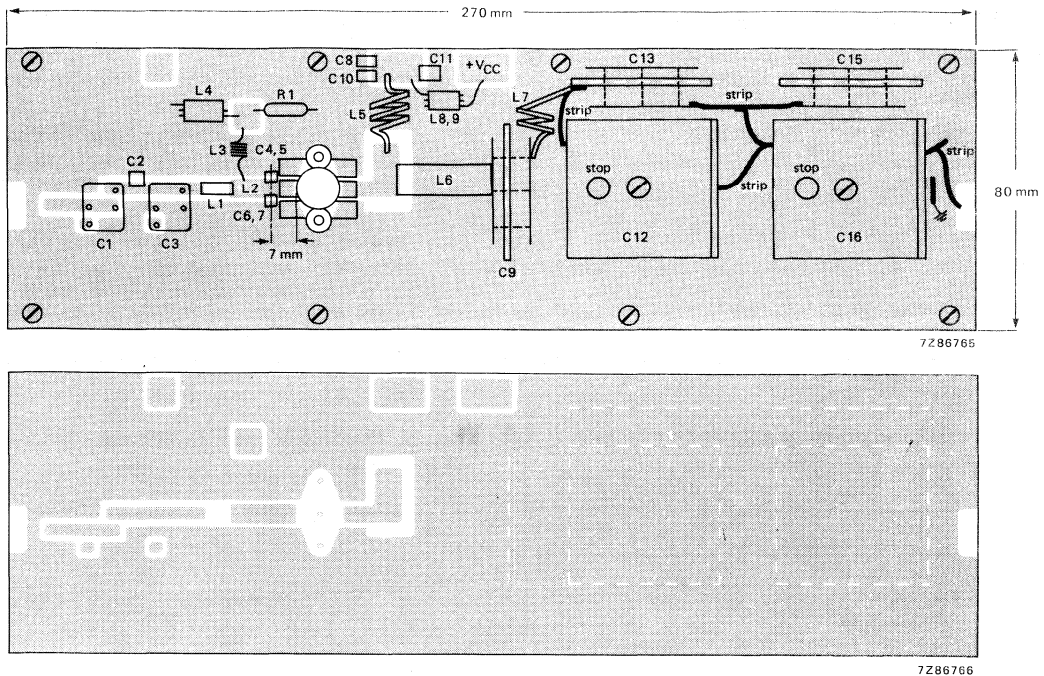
Component layout and printed-circuit board for 108 MHz class-B test circuit. (Dimensions in mm.)
